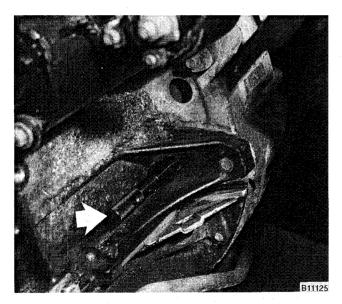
BMW special tool no. 11 2 300 installed through bellhousing and into flywheel.
